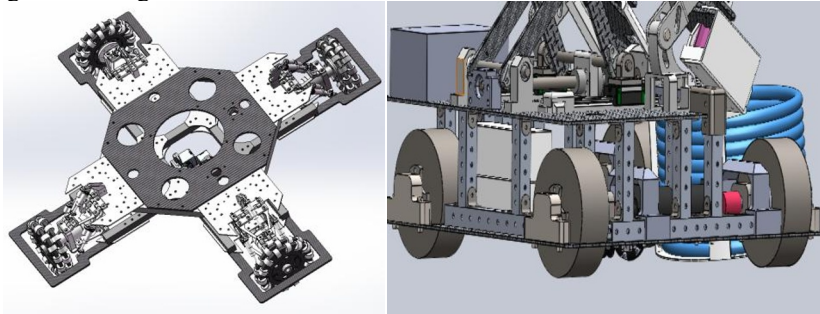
Chassis design drawings of Robot 1 and Robot 2
